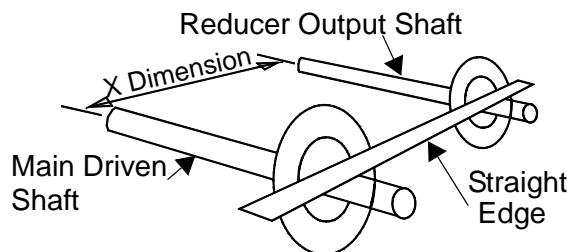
Check Sprockets Alignment - Shafts must be Parallel
